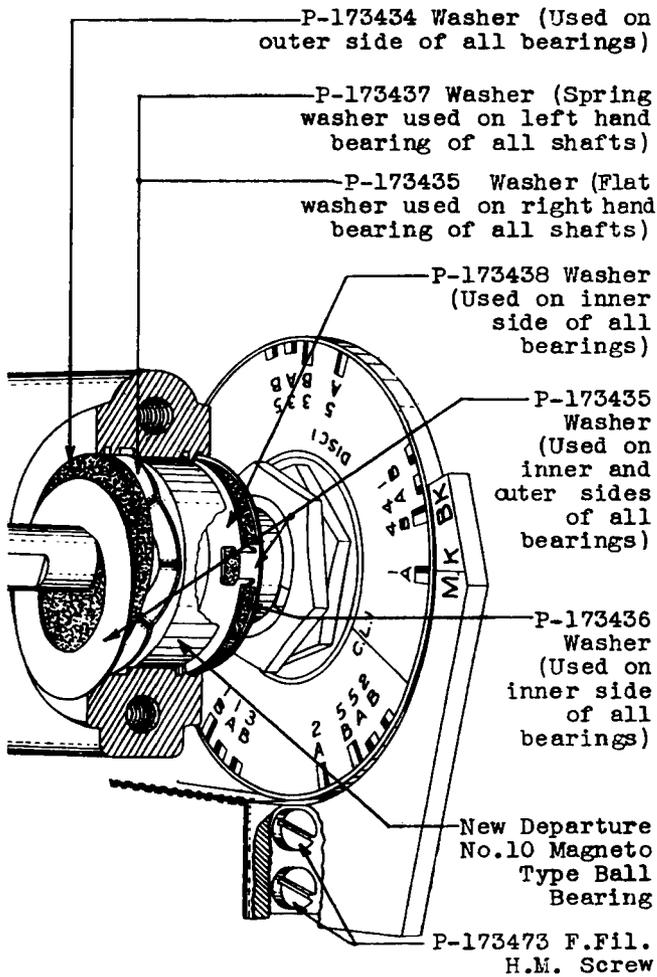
Bearing Parts (Nos. 168B, 170A and 171A Interrupters)
